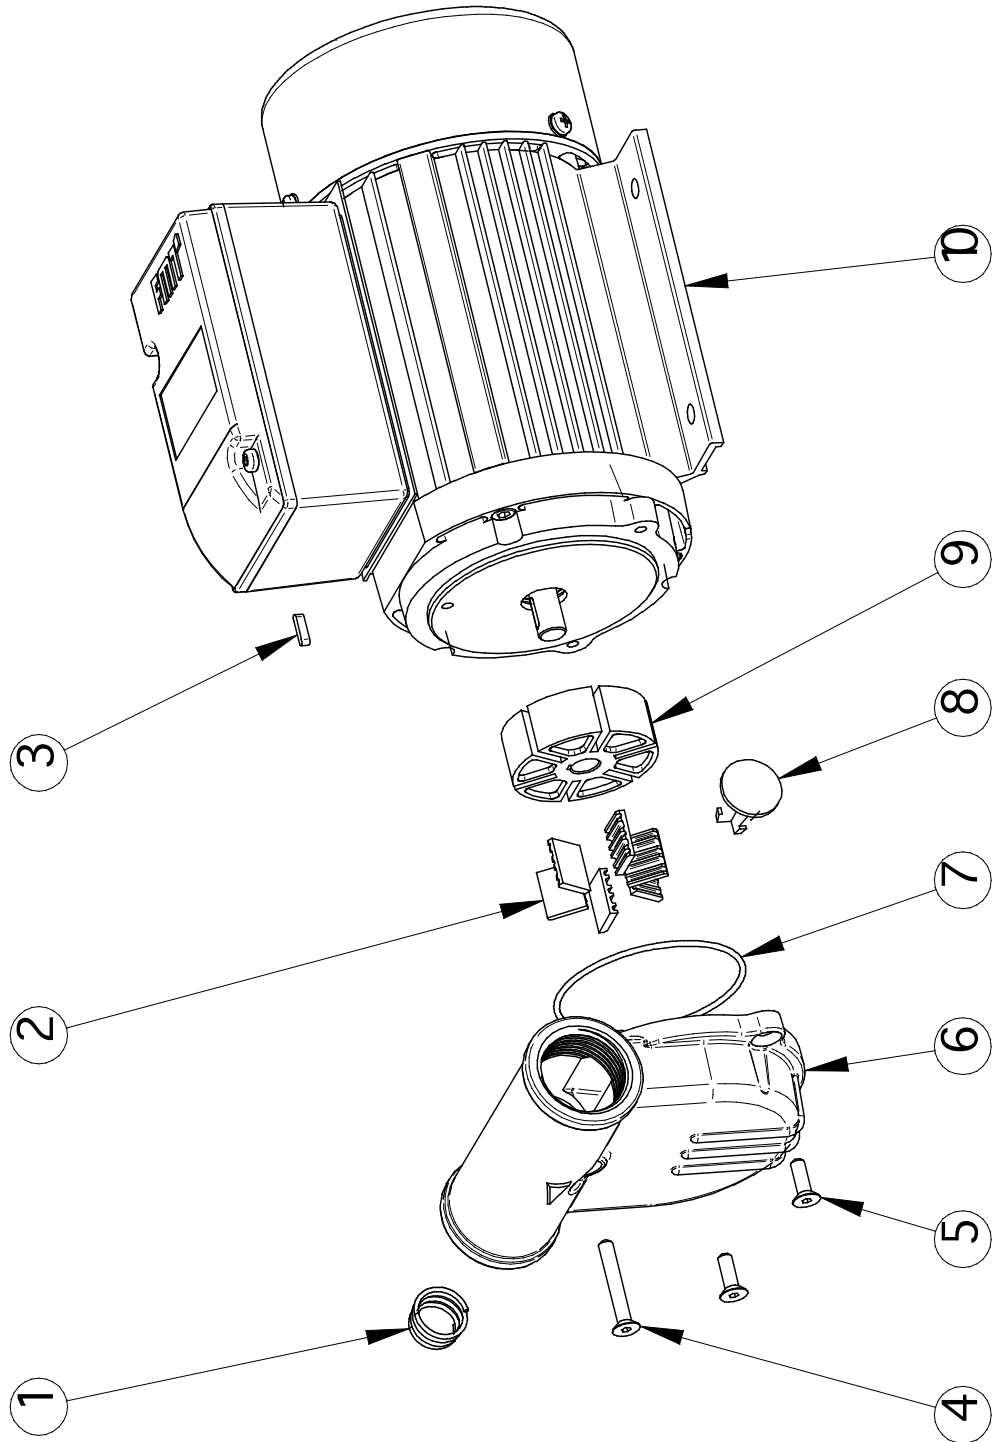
Fehler! : Exploded View of the Diesel Pump
